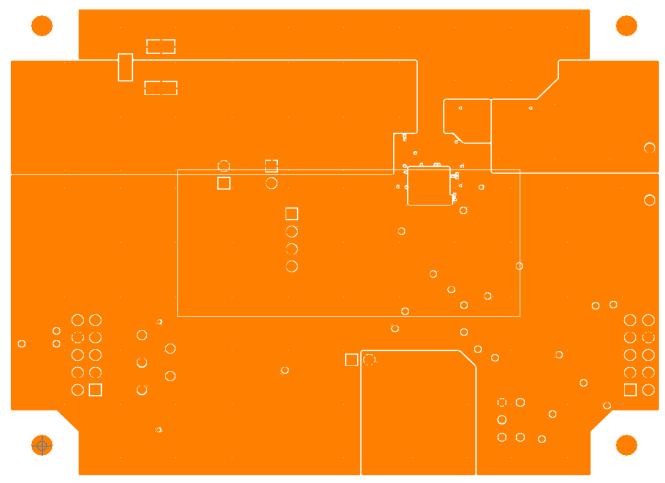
PCB - INNER LAYER 3 (VIEWED FROM TOP)
